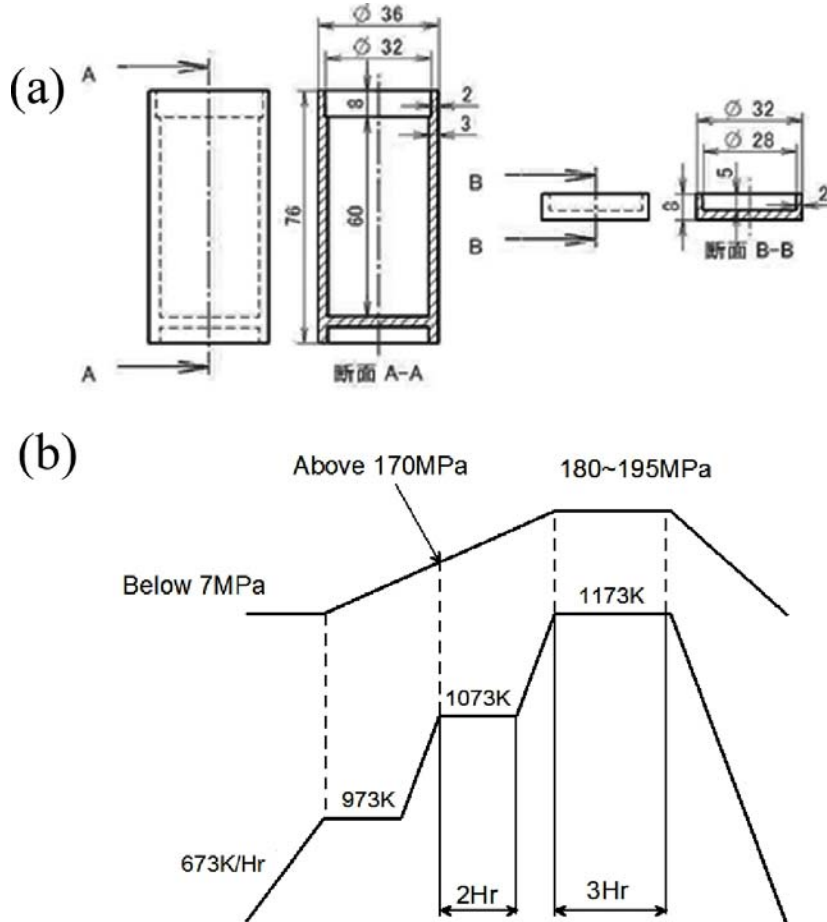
(a) Shape and dimension of HIP container; (b) Hot isostatic pressing sintering process.
